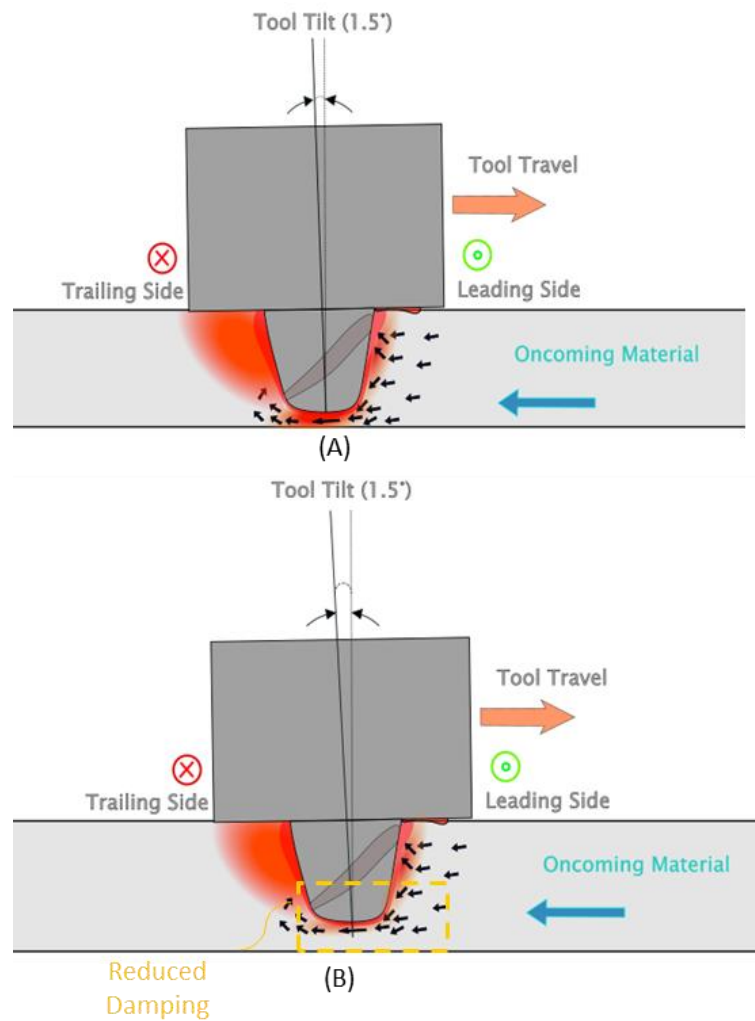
(A) Lateral cross-sectional view for full penetration weld with the material flow; (B) Lateral cross-sectional view for partially penetrated weld with the unwelded region
